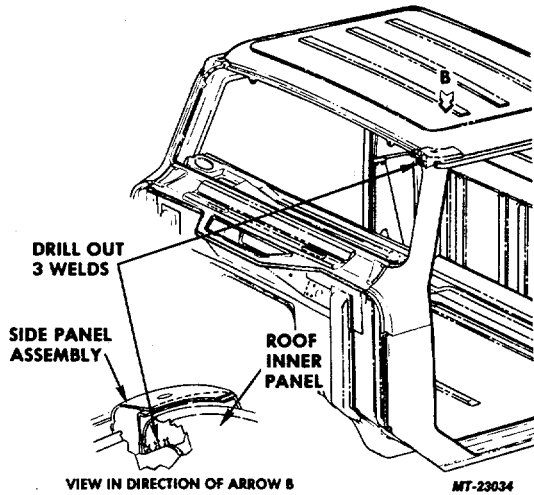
Side Panel to Roof Outer and Inner Panel Spot Welds (Outer Roof Panel Not Shown)
